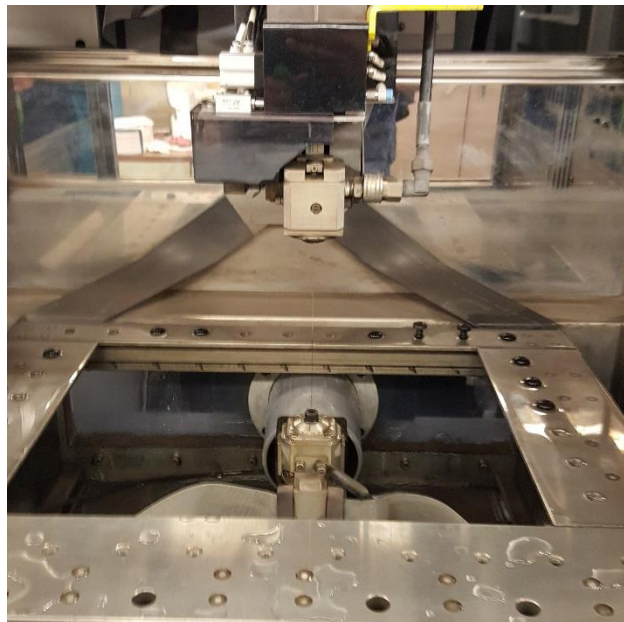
Picture of the electrical discharge machining equipment used to cut the SiC sample.
